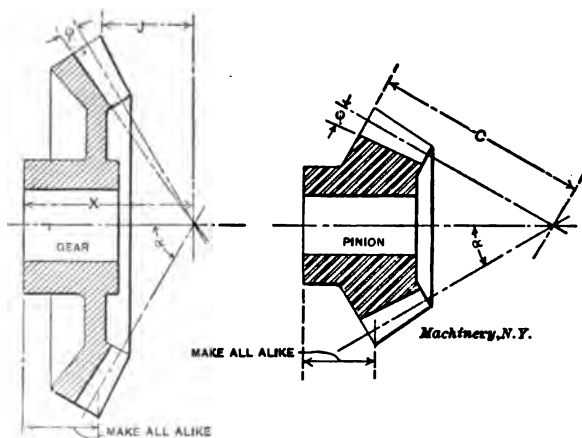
and 21. Additional Dimensions for Gears to be Cut by the Templet Planing Process, or on the Gleason Generating Machine
